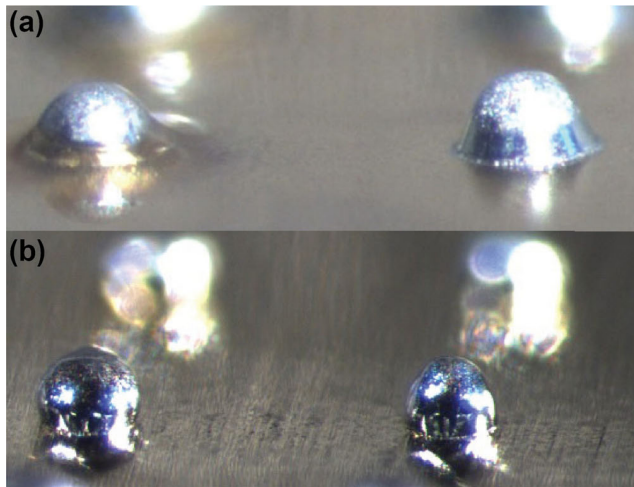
Side view photograph of printed solder bumps on PCB samples with ENIG finishing: (a) with a non-clean flux layer; and (b) without flux layer. They were both printed at printhead temperature of 400 °C and substrate temperature of 180 °C.
